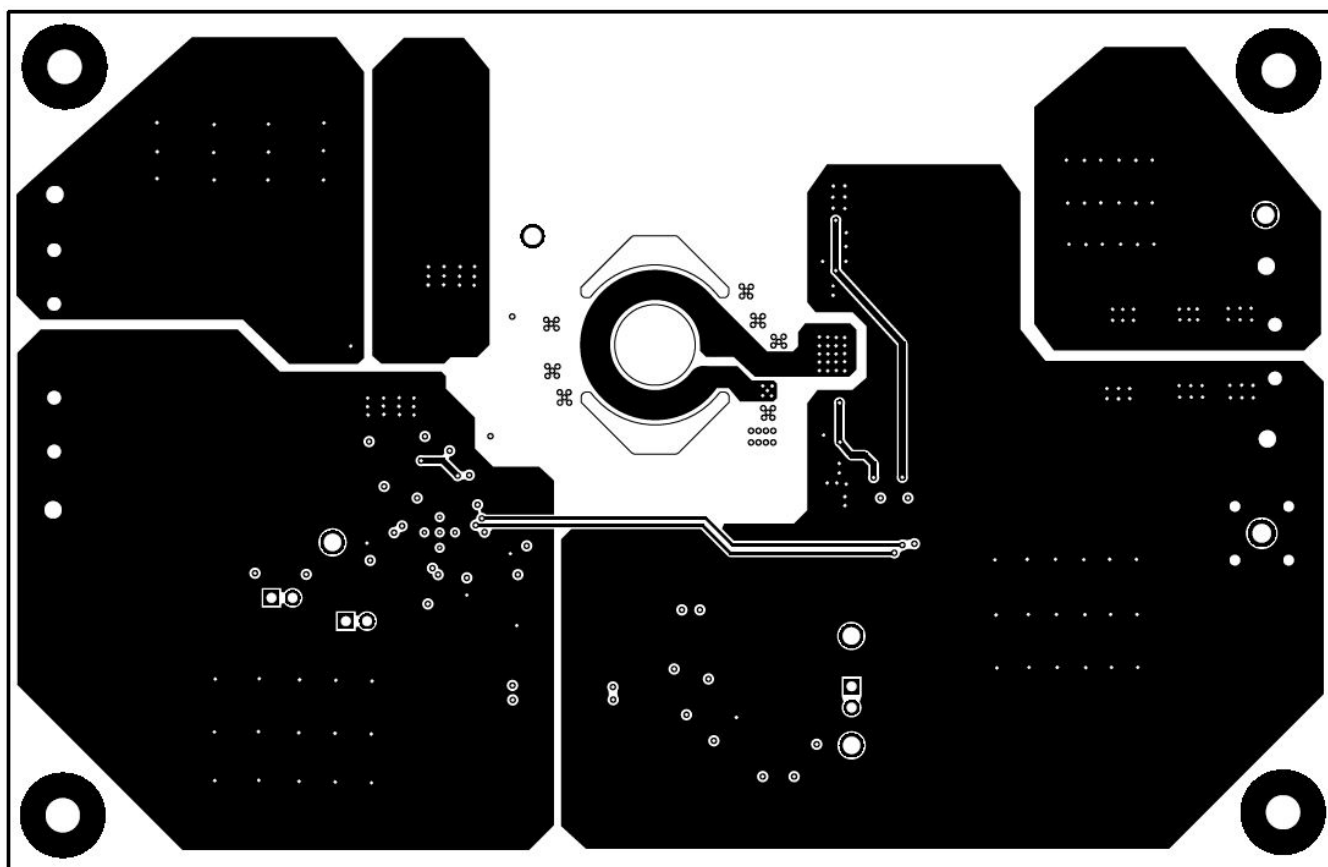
LM5036 EVM: Layer 3 PCB Assembly layout
